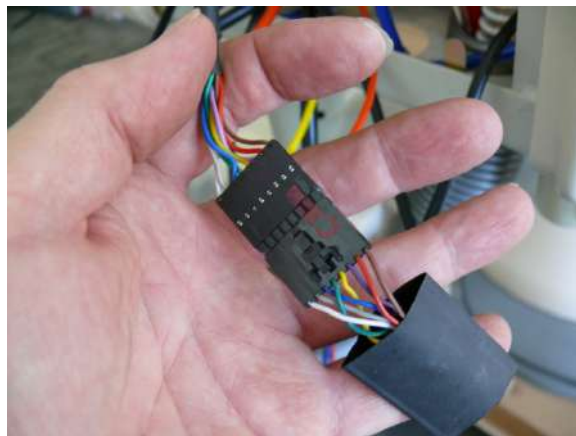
Connect the cables. Match the colors. Use heatshrink tubing or electrical tape on the flat cables.
